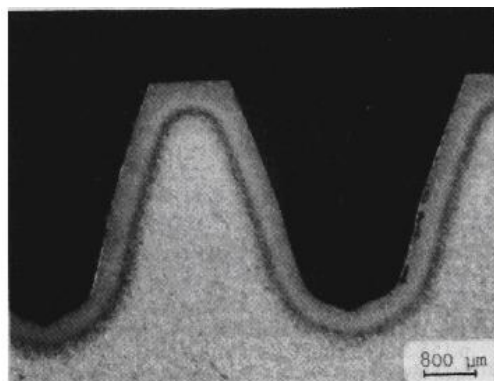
Carburized layer of gear (low carbon steel) [32].
